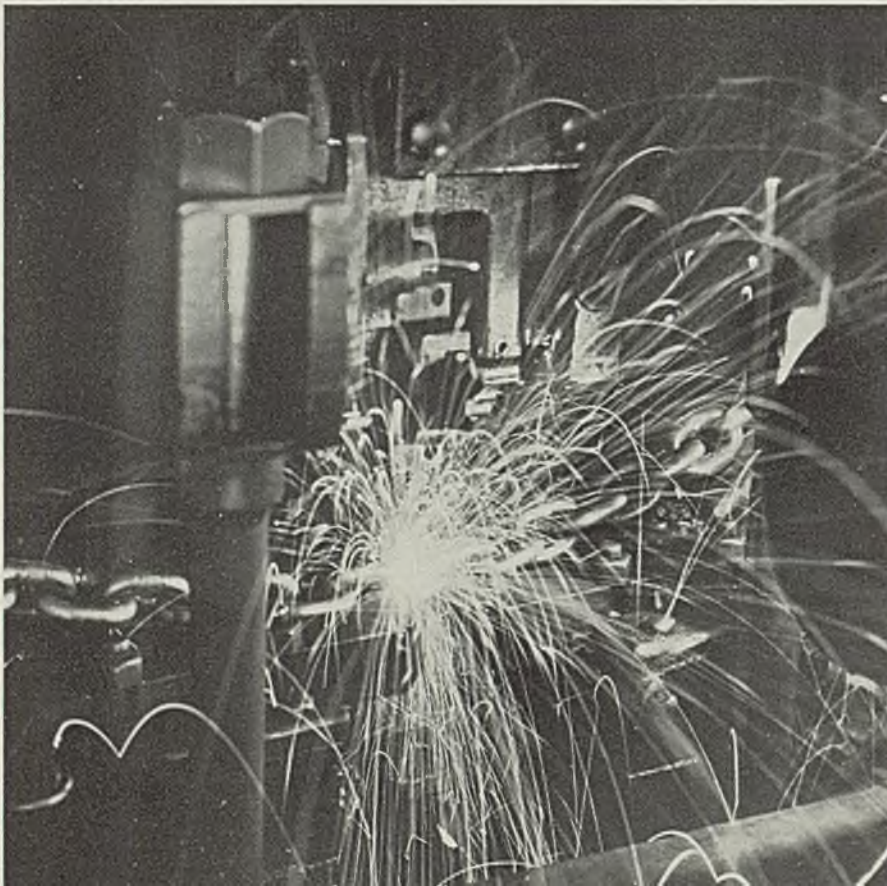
Flashing off excess metal in making the resistance welded joint in a link
